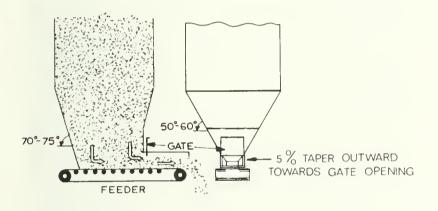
Belt feeder. Courtesy: H. Colijn.
